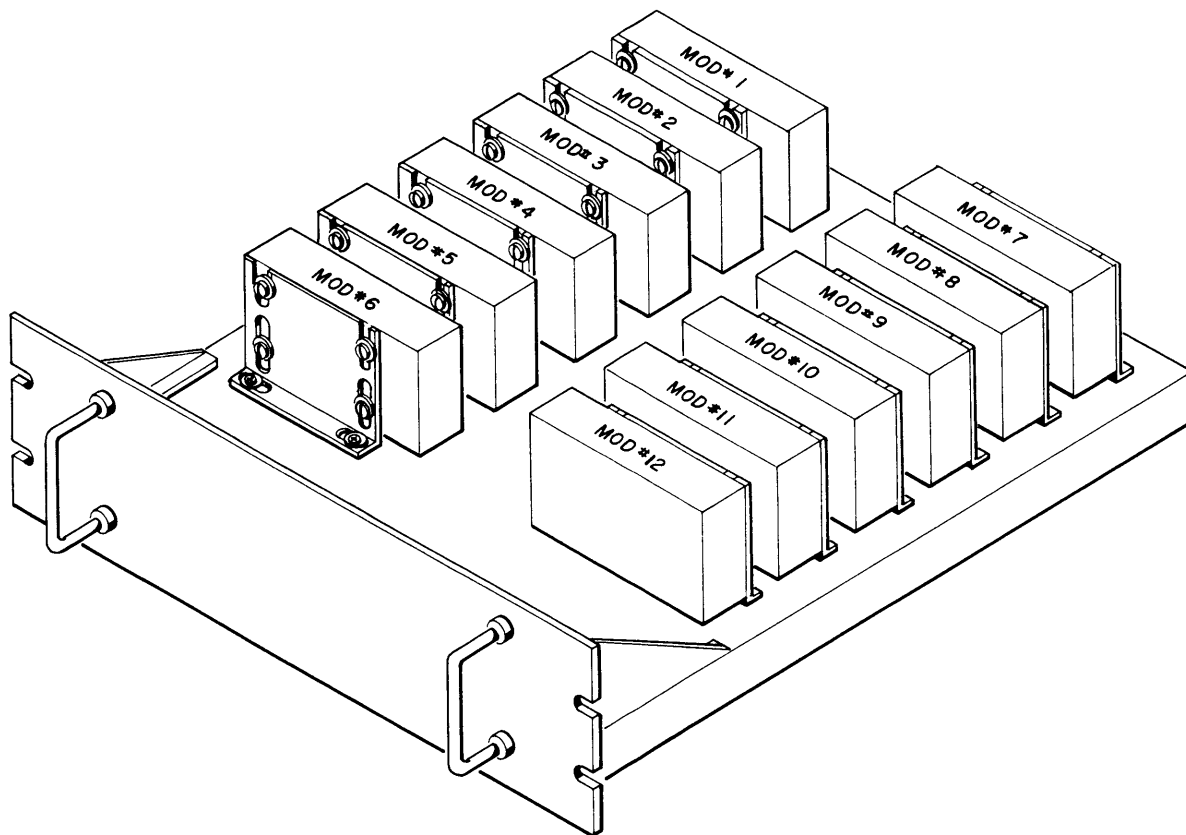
AN/FGC-60/19 Modulator Tone Converter Drawer, Isometric View
